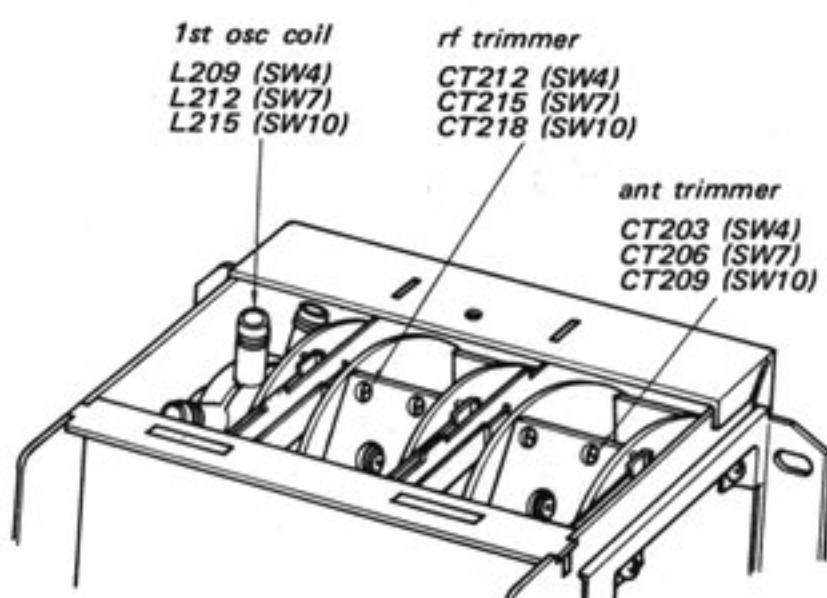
Adjusting parts for SW4, SW7, SW10
